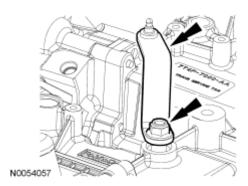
Identifying Manual Control Lever & Nut Courtesy of FORD MOTOR CO.
